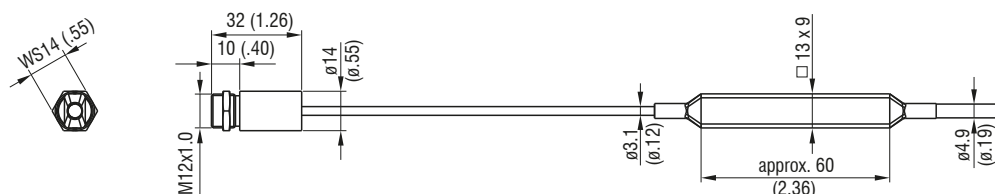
Dimensional drawing thermoMETER SE-SF15-S05-C05, dimensions in mm (inches, rounded off)
